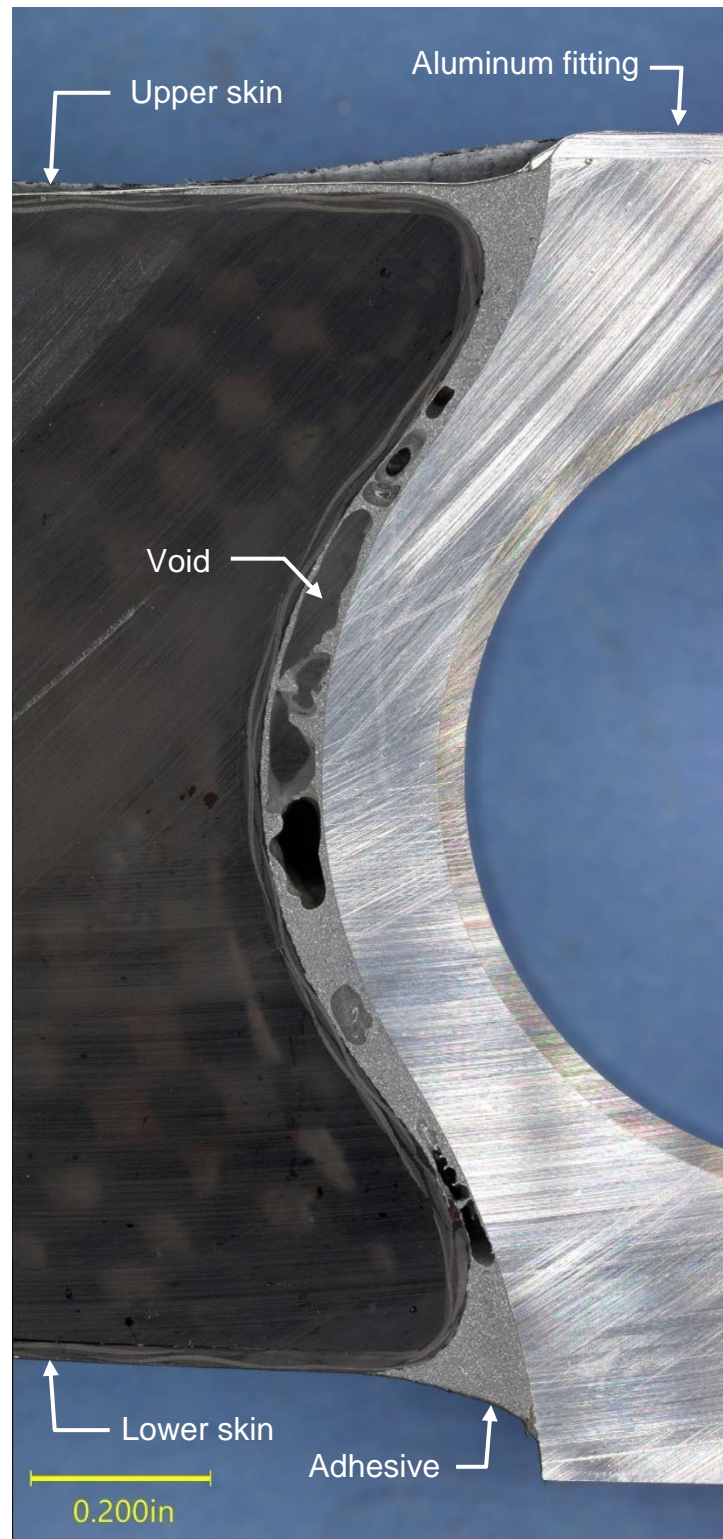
Cross section through LHR servo flap inboard closeout bond.
